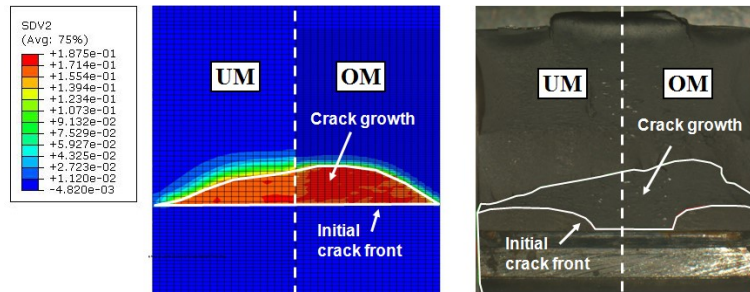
Crack growth in the joint with two weld metals and a crack through both of them – fracture surface of SENB specimen [70].
